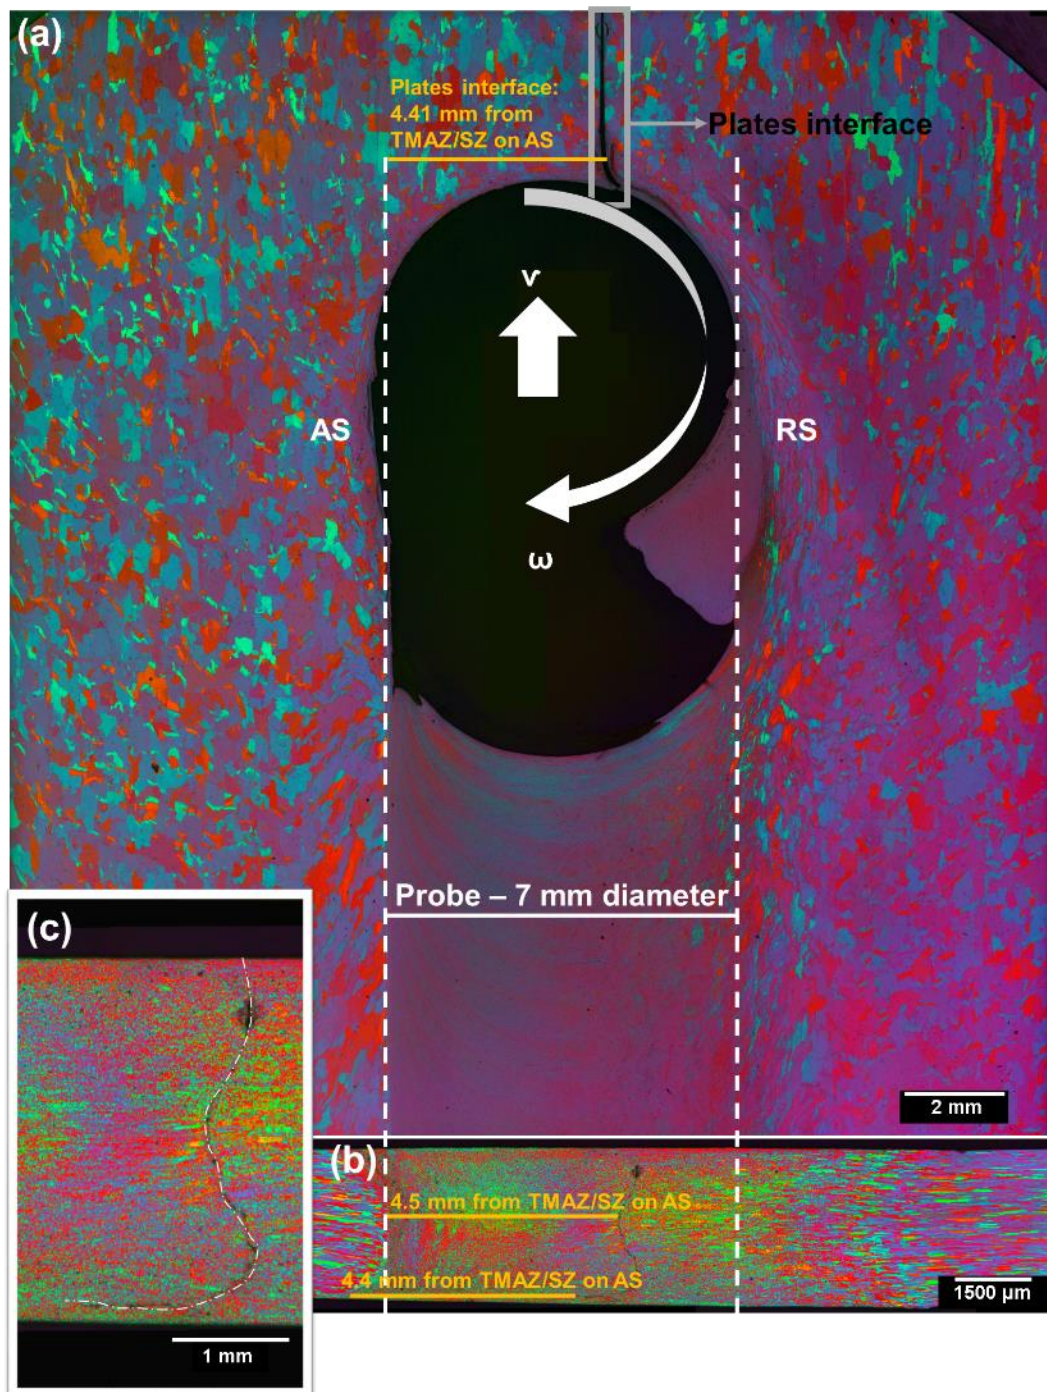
Image (a) is a top view macrograph, perpendicular to welding direction, of a stop action with a broken probe, highlighting the interface between two AA2060-T8 plates. Figure (b) is a front view in the welding direction of the weld displaying different measurements positions that indicates the oxide line matches with the plates interface. Image (c) highlights a non-consolidation oxide
